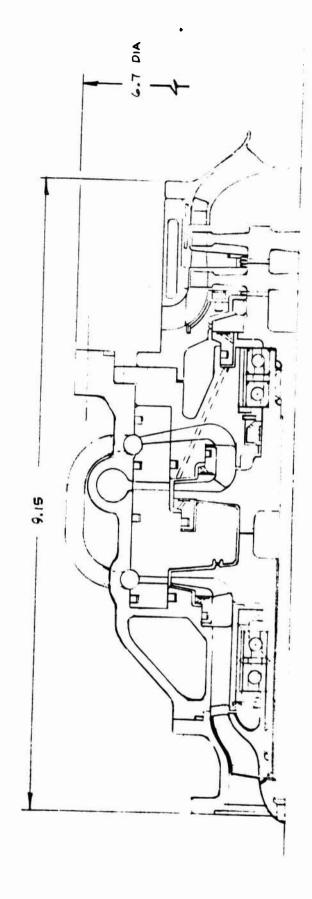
10K Fuel Turbopump Concept, II - Back-to-Back Shrouded Impellers
